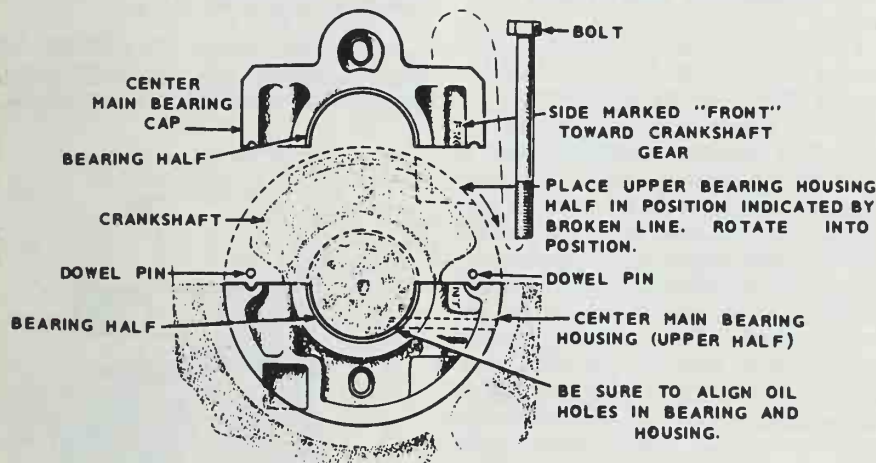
Installation of center main bearing used on four-cylinder engines. Refer to procedure in text.
